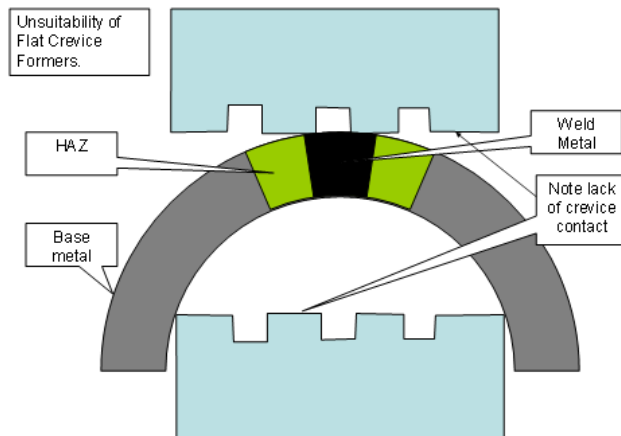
Schematic of the traditional flat crevice corrosion fixture attempting to test a tubular product. Thanks to John Grubb from ATI for supplying the drawing.
